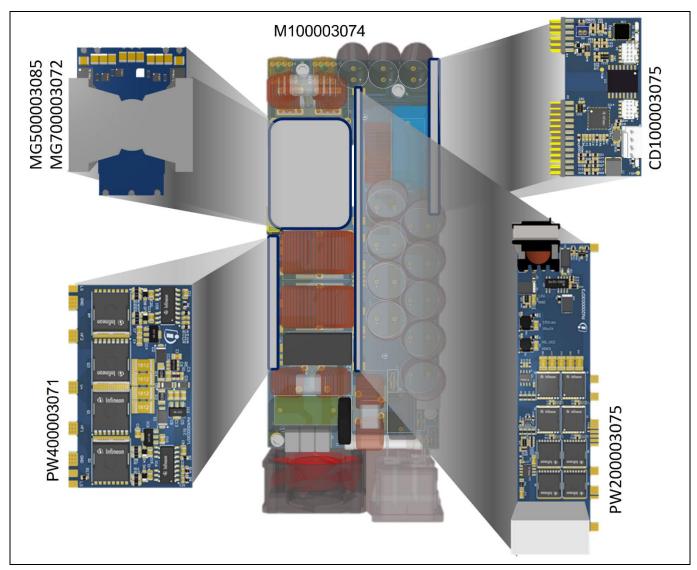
REF_3K3W_HFHD_PSU main board and daughter cards with their assembly
